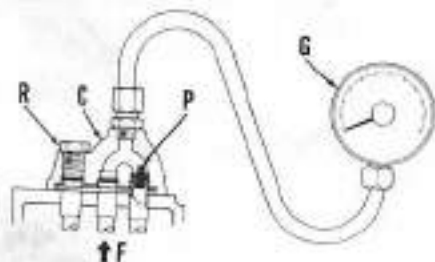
View showing installation of gage for checking hydraulic pump relief pressure on 885 and 995 models. Axle cover plate (C) must be removed and a special plug (P) installed to block passage to control valve. Flow (P) is then closed except to gage (G). Return port (R) is for external hydraulic use.
